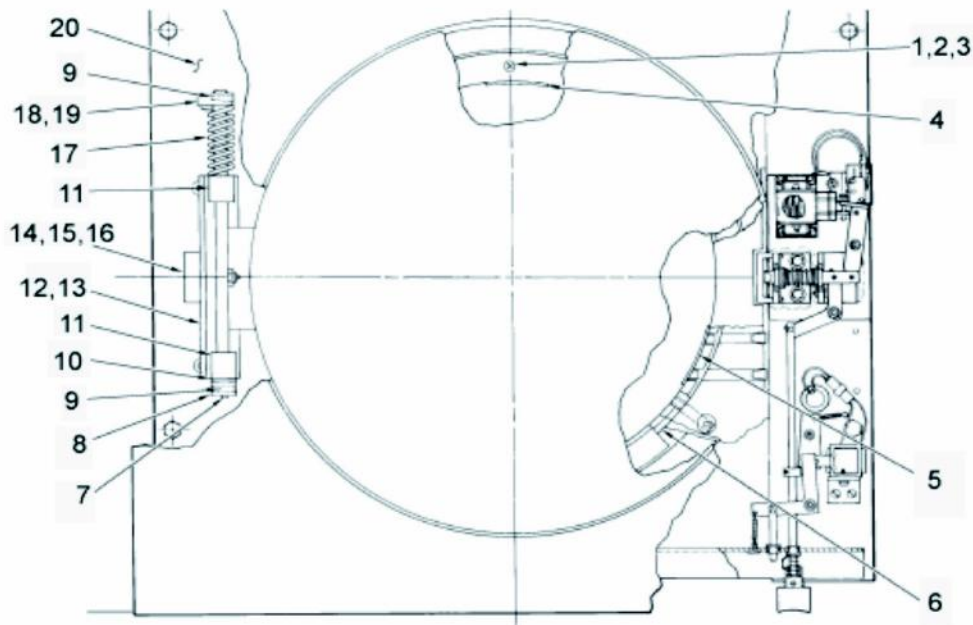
RC5C PLUS Door Interlock Assembly (Part B)
